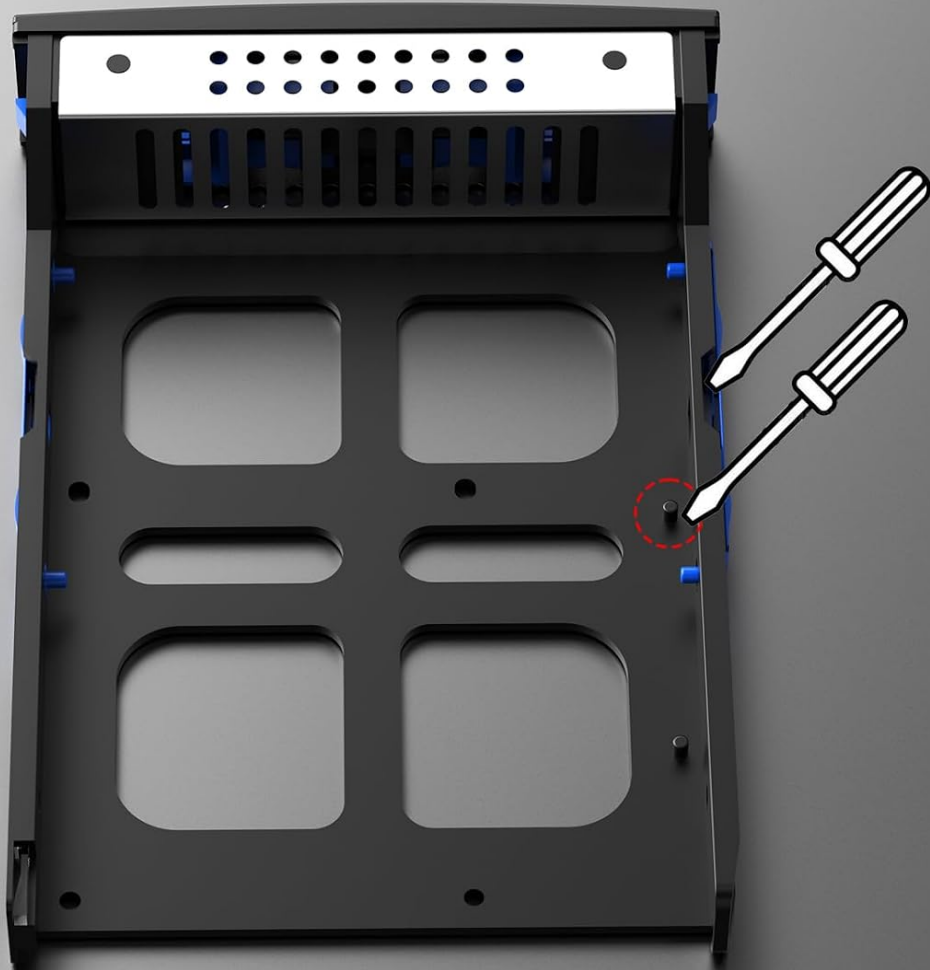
Guidance on modifying drive trays if protrusions interfere with 3.5" drive installation.
